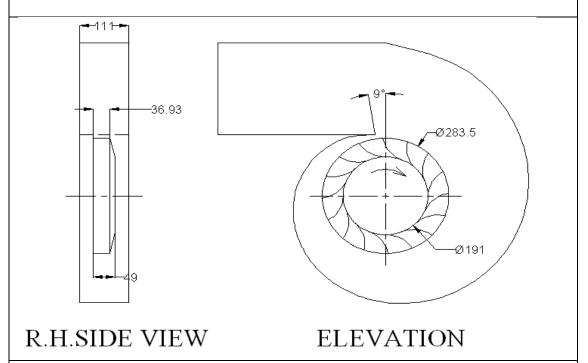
Impeller and Volute Casing Assembly as per Church Design
